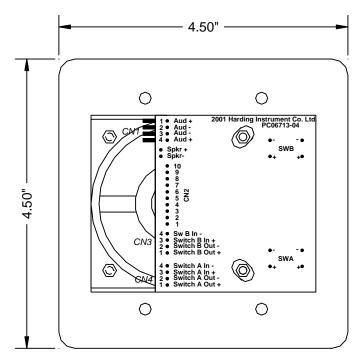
Rear View of SPM-420 Printed Circuit Board Showing Header Positions
